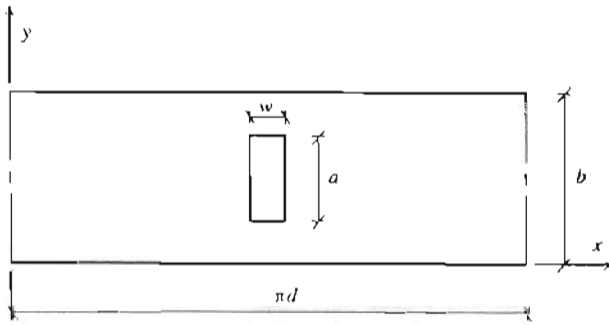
Developed bearing surface showing the coordinate axis and bearing and groove geometry
